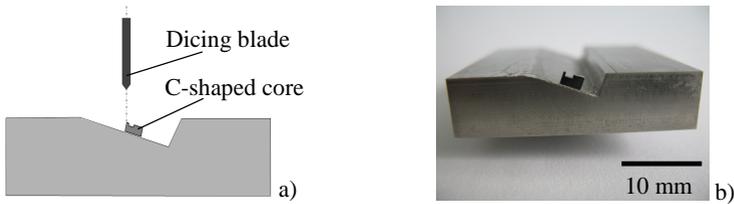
Mounting tool a) schematic, b) head core on the mounting tool high-precision wire winding tool was used, which creates the 50 turns of the Cu wire on each C-core by means of a semi-automatic method (Fig. 3). The head core was mounted in such a way, that it could be exposed to a rotation and translation at the same time. The Cu-wire was guided along the core until the 50 turns were achieved.
